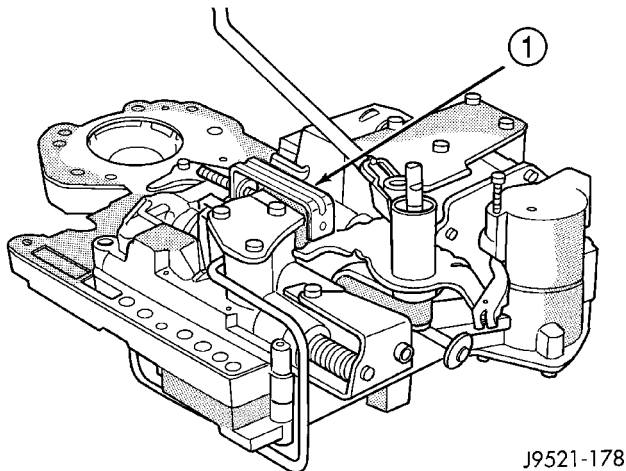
Seating 3-4 Accumulator On Lower Housing
